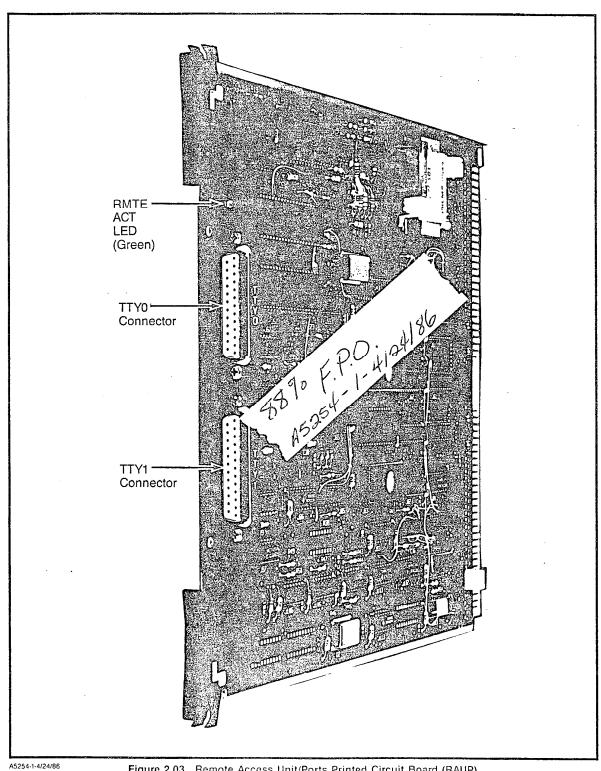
Remote Access Unit/Ports Printed Circuit Board (RAUP)
